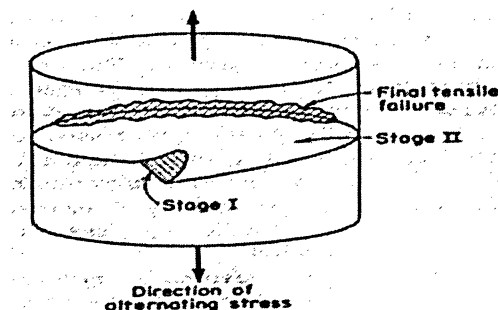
Location of the three stages in a fatigue fracture under axial stress [48, p. 761]
